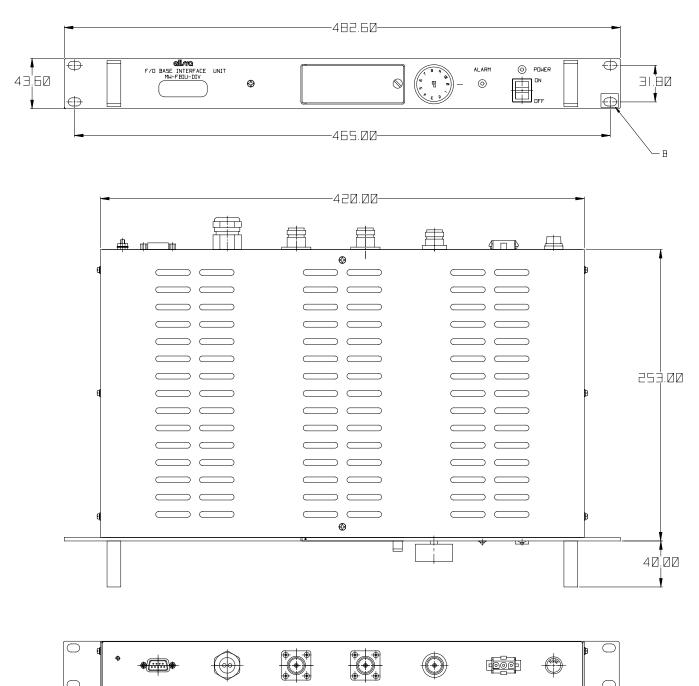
FBIU MECHANICAL OUTLINE DRAWING
